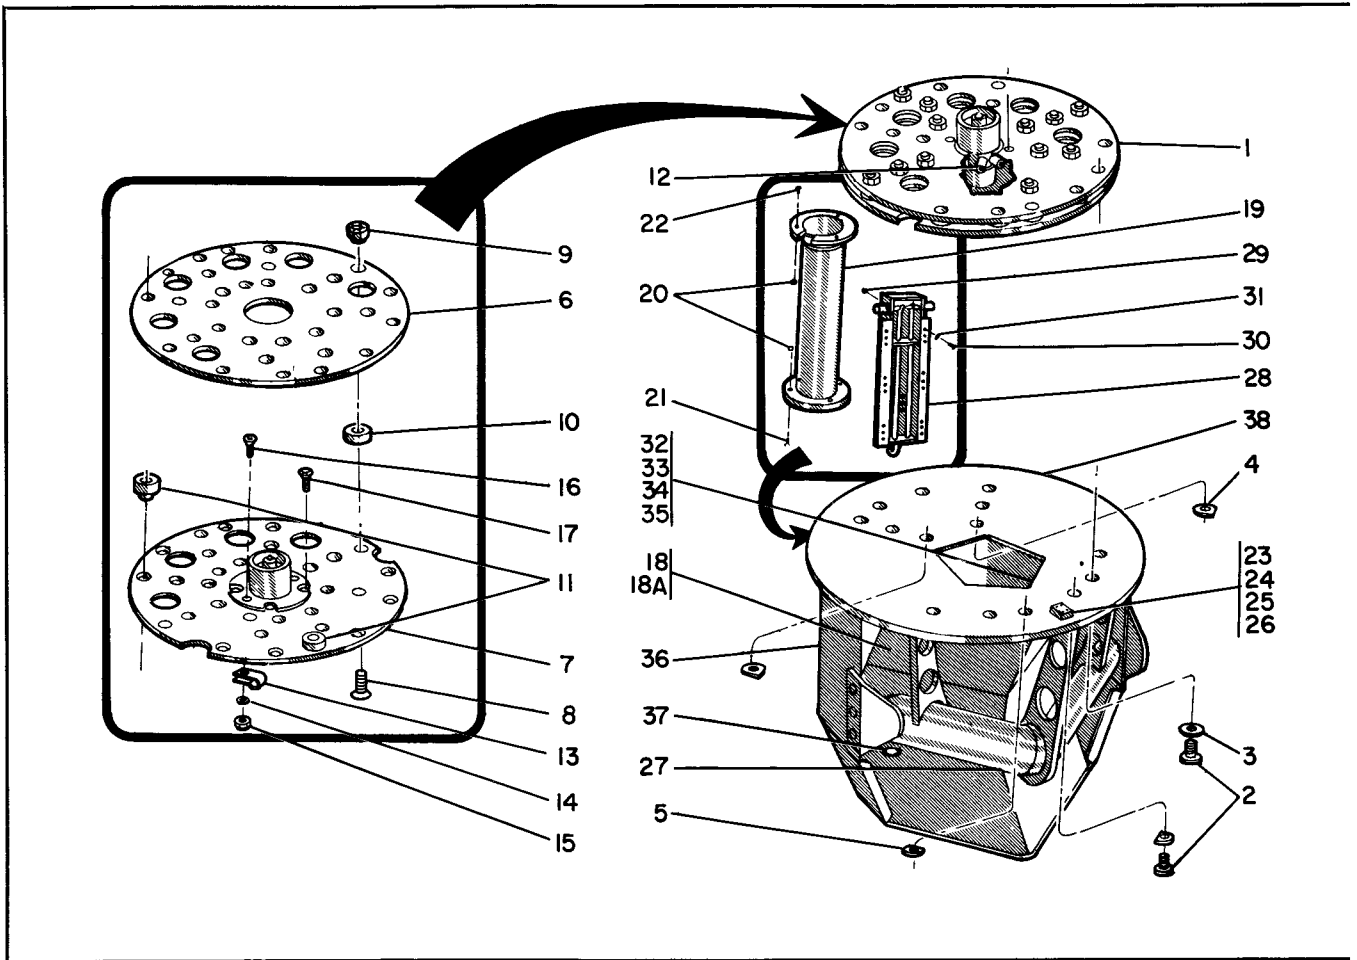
A. Antenna Assembly AS-655/ALA-6 (Ser. Nos. 529 thru 959)
